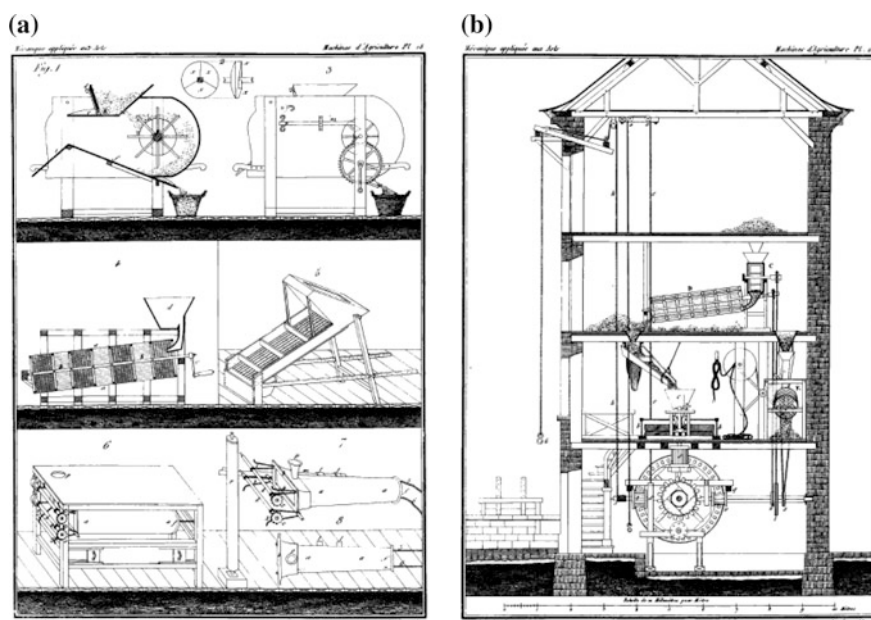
Examples of machine drawings in the book on Machines for Agriculture by Borgnis (1819b): a machines for separation/selection of products; b mill machinery in a milling building
